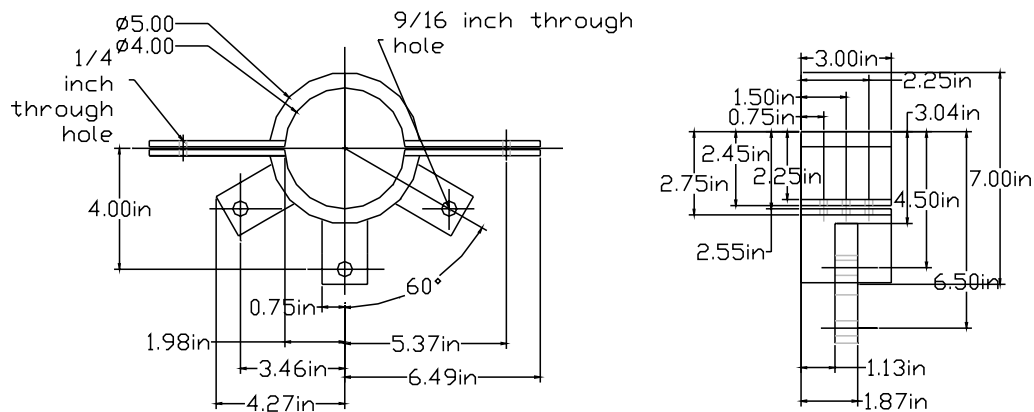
Sample clamp (#2 part of assembly drawing).
